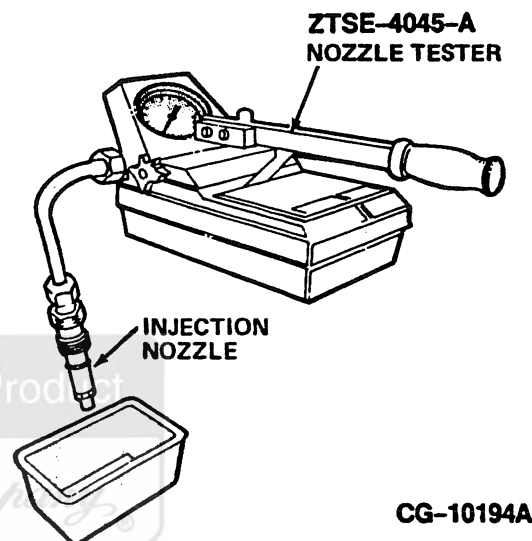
Nozzle Assembly Mounted in Test Pump ZTSE-4045-A
